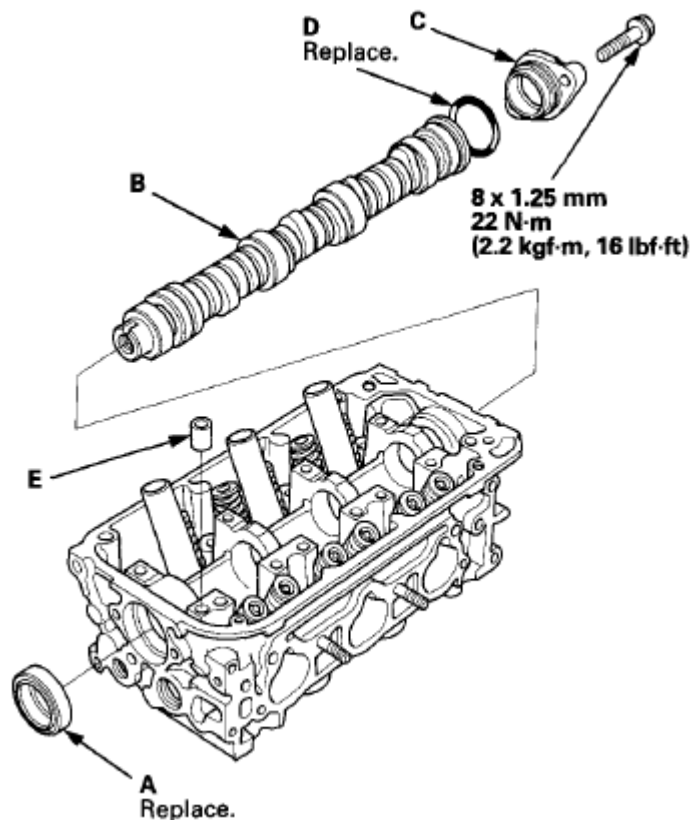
Identifying Camshaft Oil Seal With Torque Specifications
